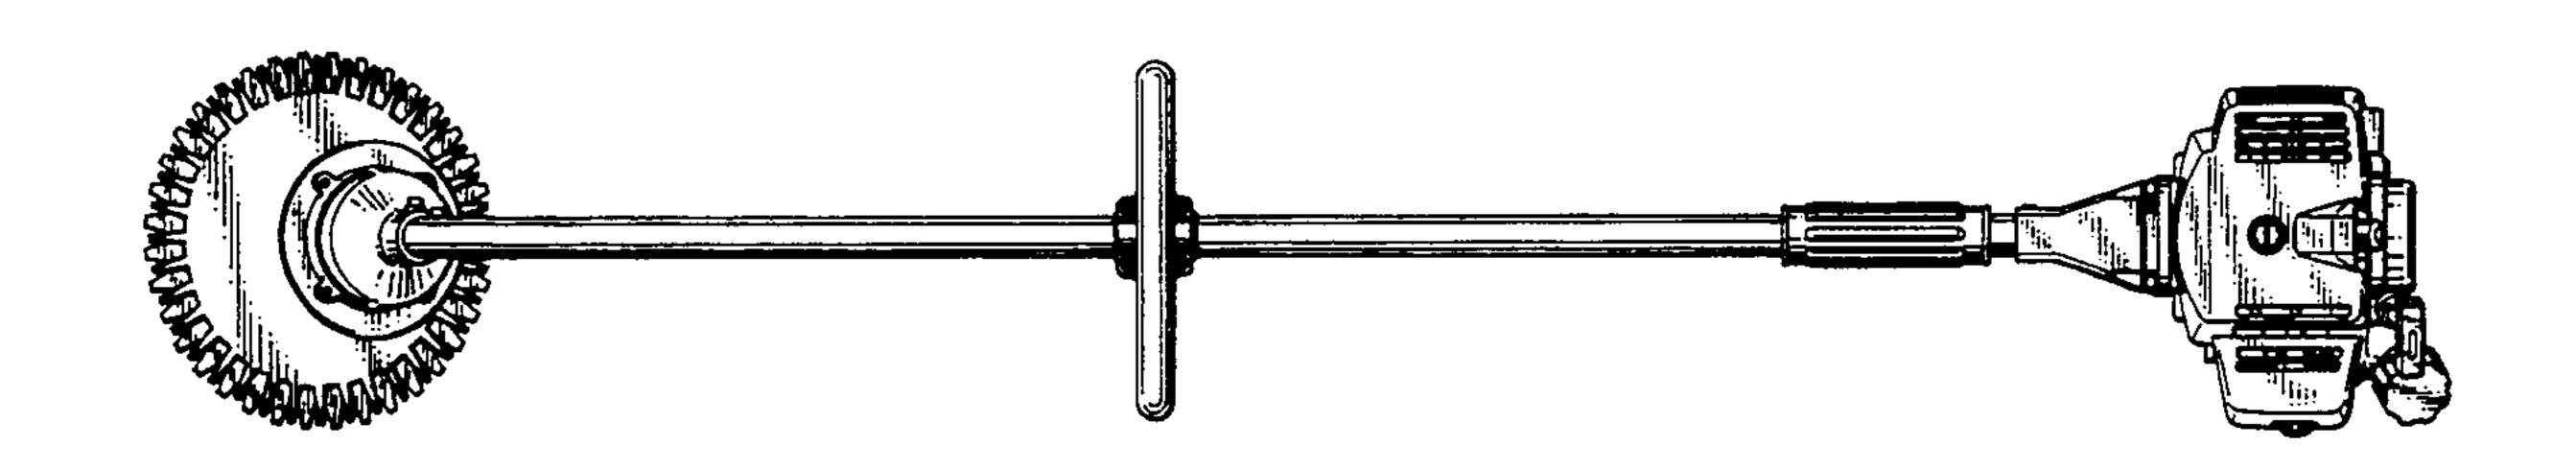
is a front elevational view of a third embodiment of a bush cutter according to our design;
